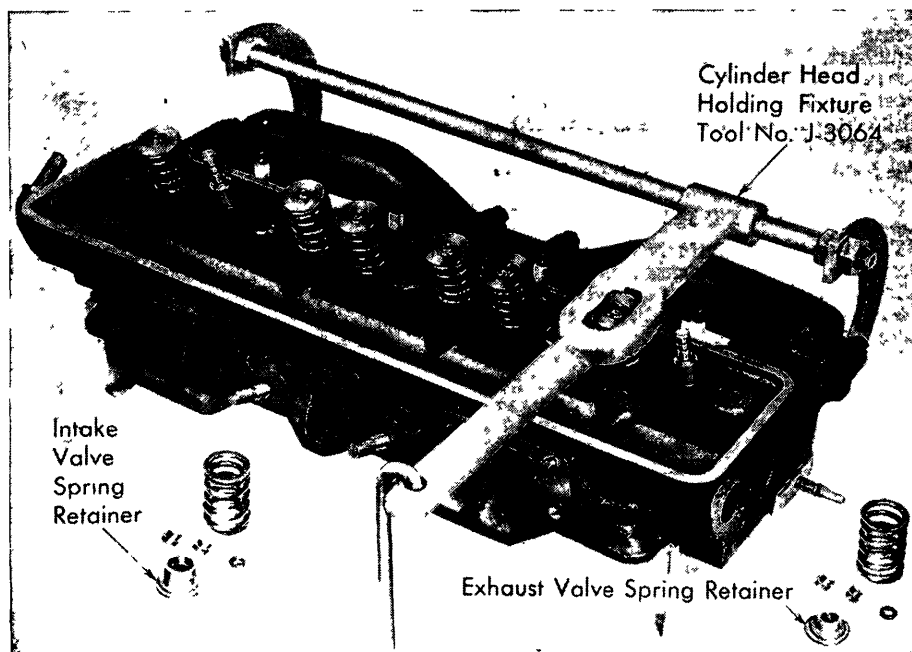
Showing tool to remove and replace valves and springs on 1949-52 V8
